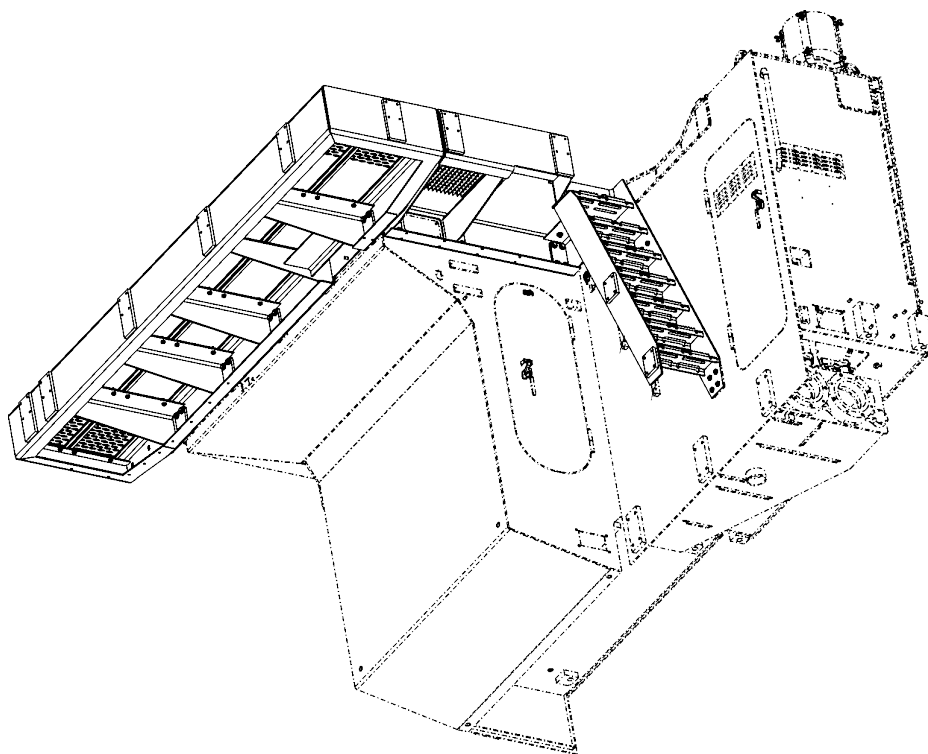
Access doors for the cab elevation and for the hydraulic tank installation
